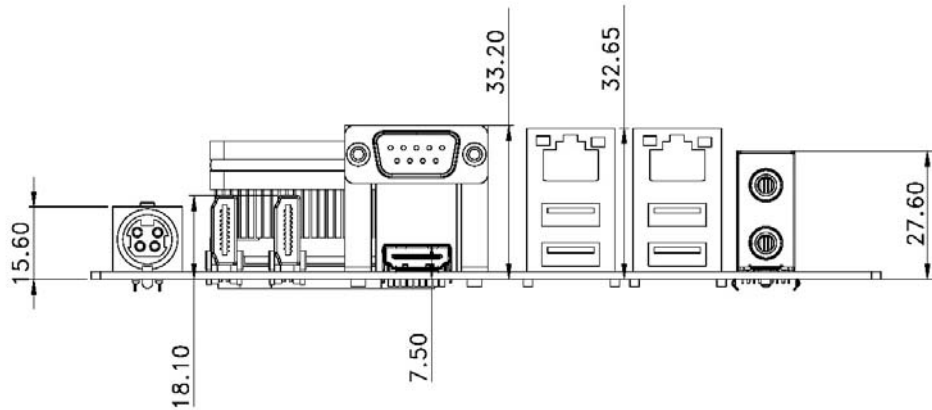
KINO-DQM170 Height Dimensions 1 (mm)
